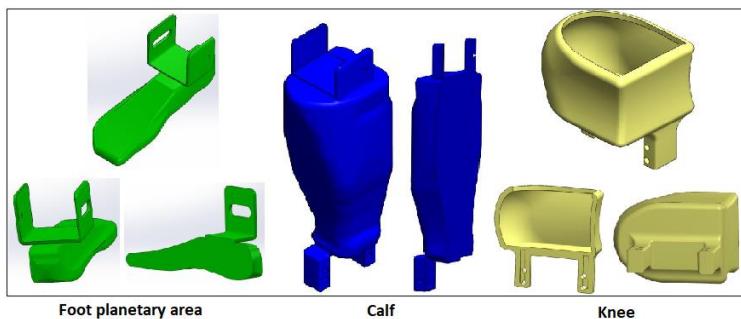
Design of the prosthetic lower limb components in SolidWorks CAD
